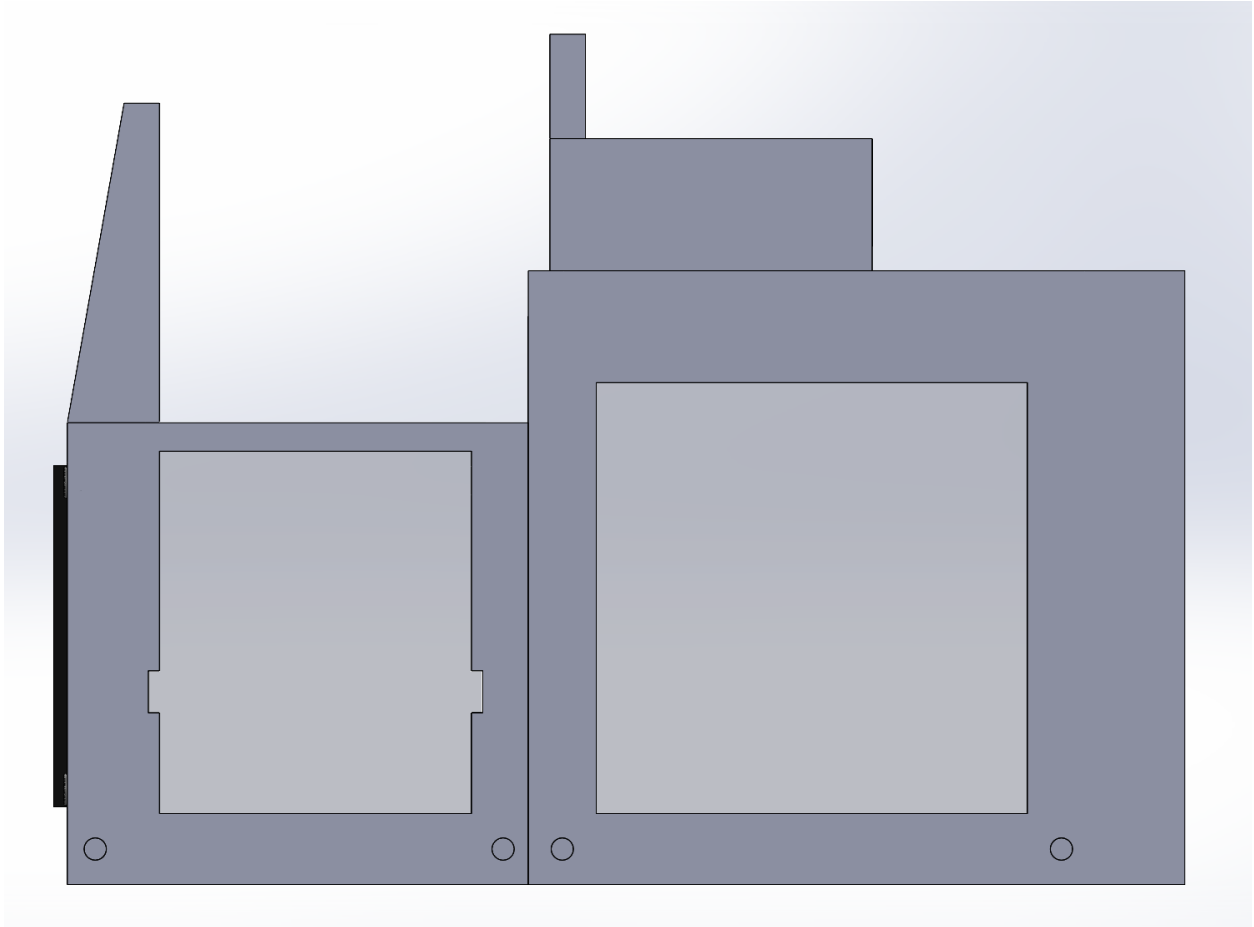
Chassis Assembly Center Hub and Motor Holder Mating View (Pre-Assembly)
